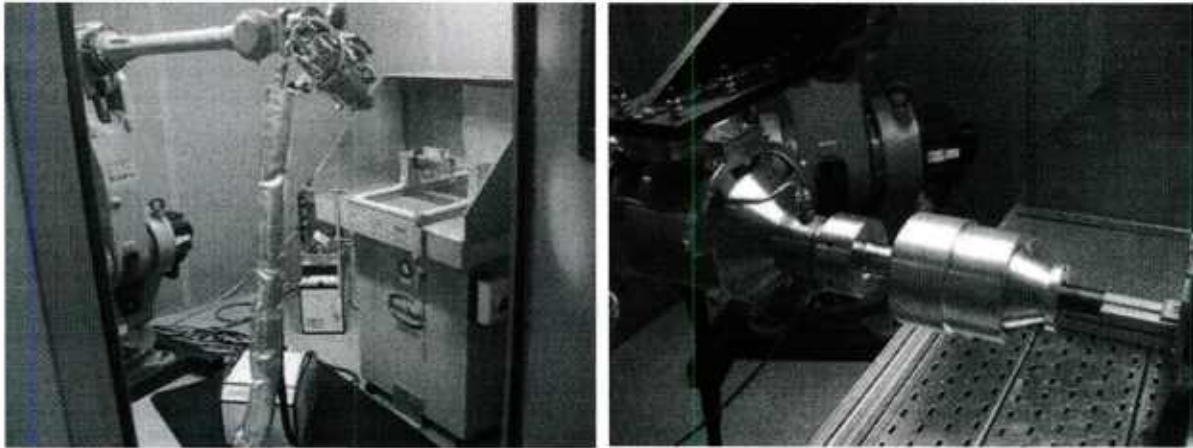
The cold spray system assembled inside the booth (a) and the cold spray gun mounted on the end of the robot arm (b).
